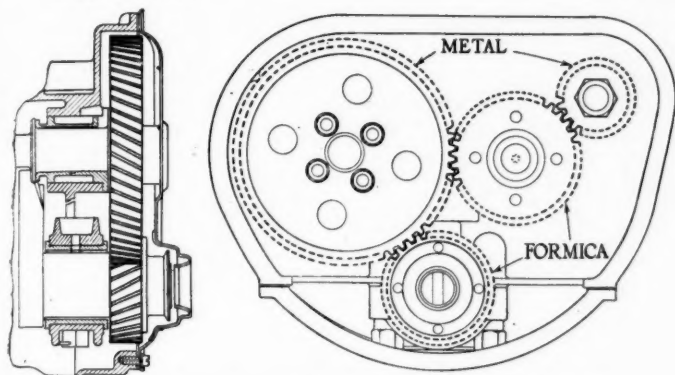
Four-gear train for front end drive on Reo engine, employing Formica gears for the crankshaft and idler gears, and metal gears for the camshaft and generator drive gears
